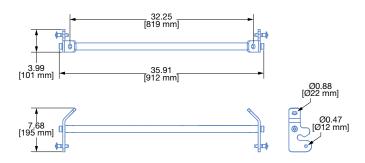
PBF-LYON Pull-Back Frame Dimensions
